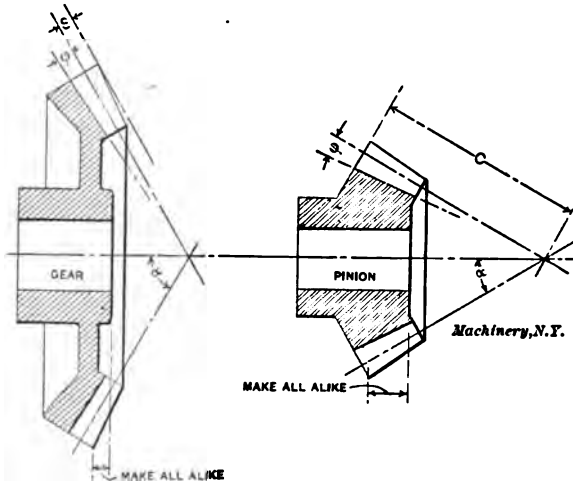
and 22. Additional Dimensions for Gears to be Cut by the Templet Planing Process, or on the Gleason Generating Machine
